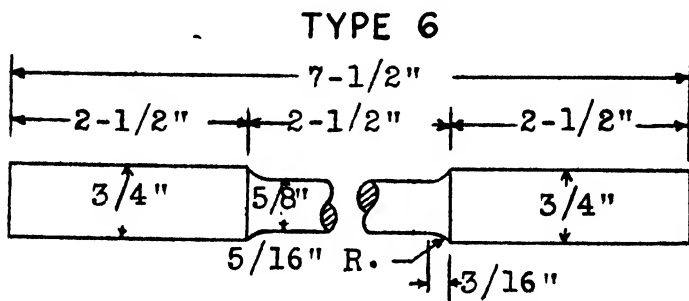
Specified Ratios of Dimensions for Test Specimens for Tensile Strength Tests of Malleable Iron Castings.
